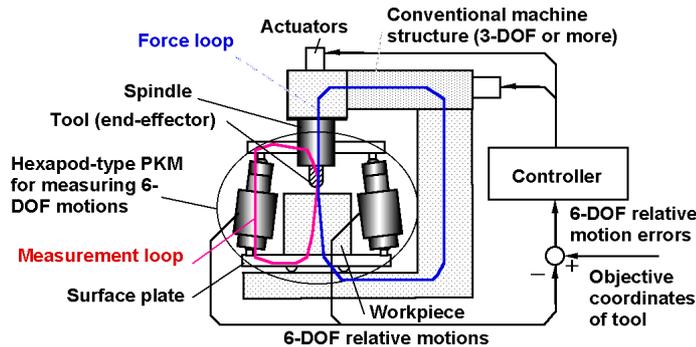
Fundamentals of proposed machine system using 6-DOF measurement device between tool and workpiece
